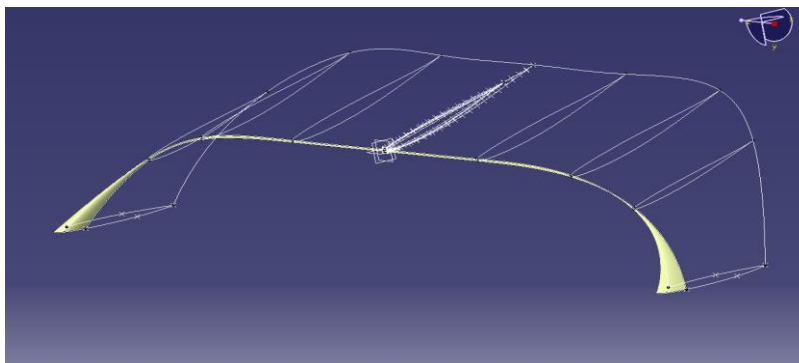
Design of the EDGE surface of the spoiler using Surface technique
